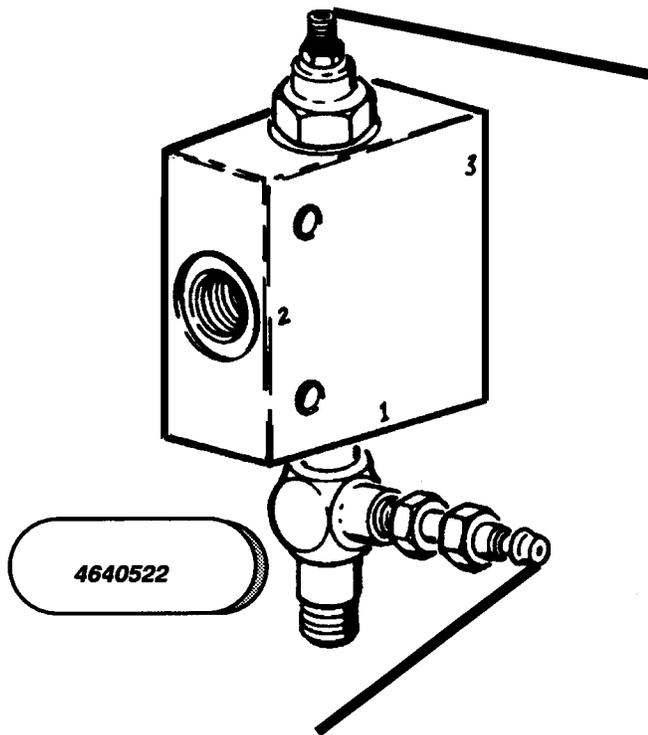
Vickers Proportional Valve Pressure Setting, Machines Built To Present. (Sheet 3 Of 4)
